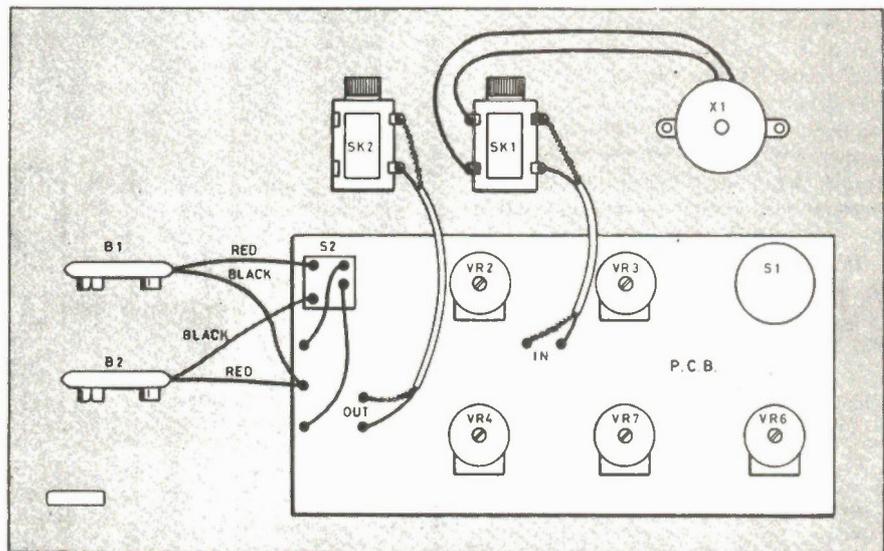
Details of the interwiring of the jack sockets, battery connectors, and piezo pick-up.
